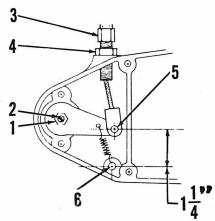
Clutch adjustment points are shown. Adjustment is usually accomplished at cable adjuster (4).
